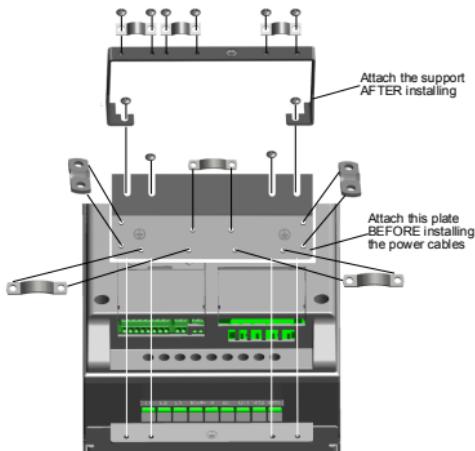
Attaching the PE-plate and API cable support, MI4 - MI5
